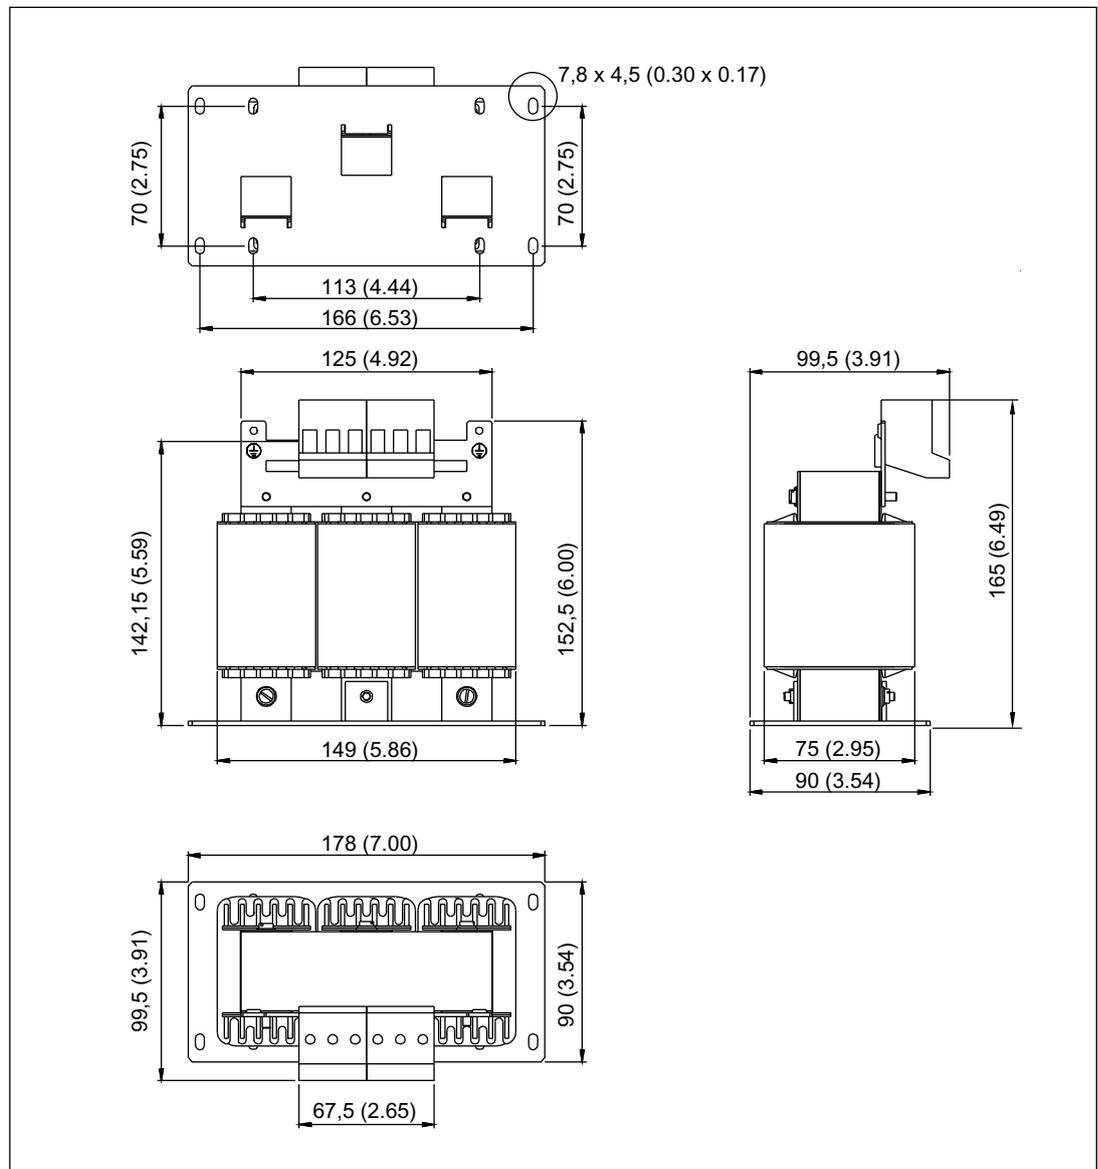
Dimension drawing: Line reactor for Basic Line Module (20 kW)
